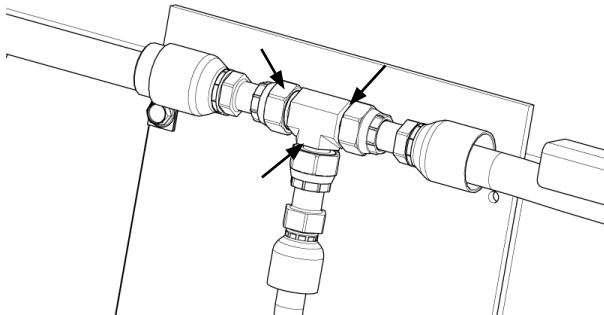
Check T Fittings On Front Side of Struts for Leaks
